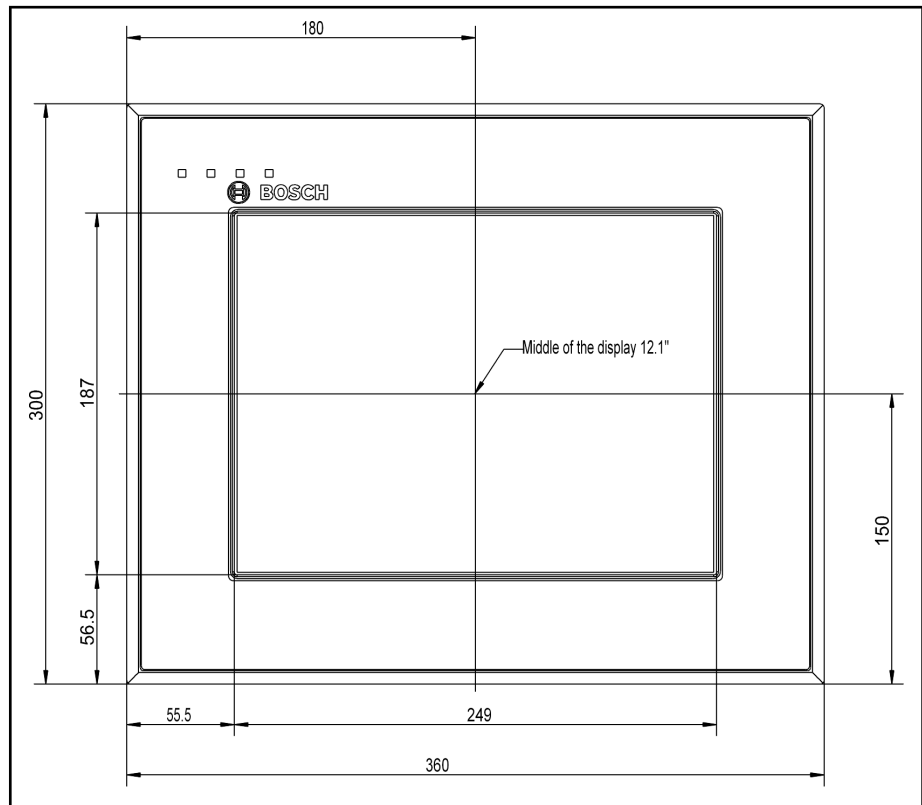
Dimensions: Front panel of the VDP 16.3AK
